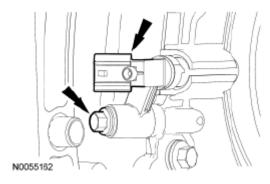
Locating CKP Sensor Courtesy of FORD MOTOR CO.
